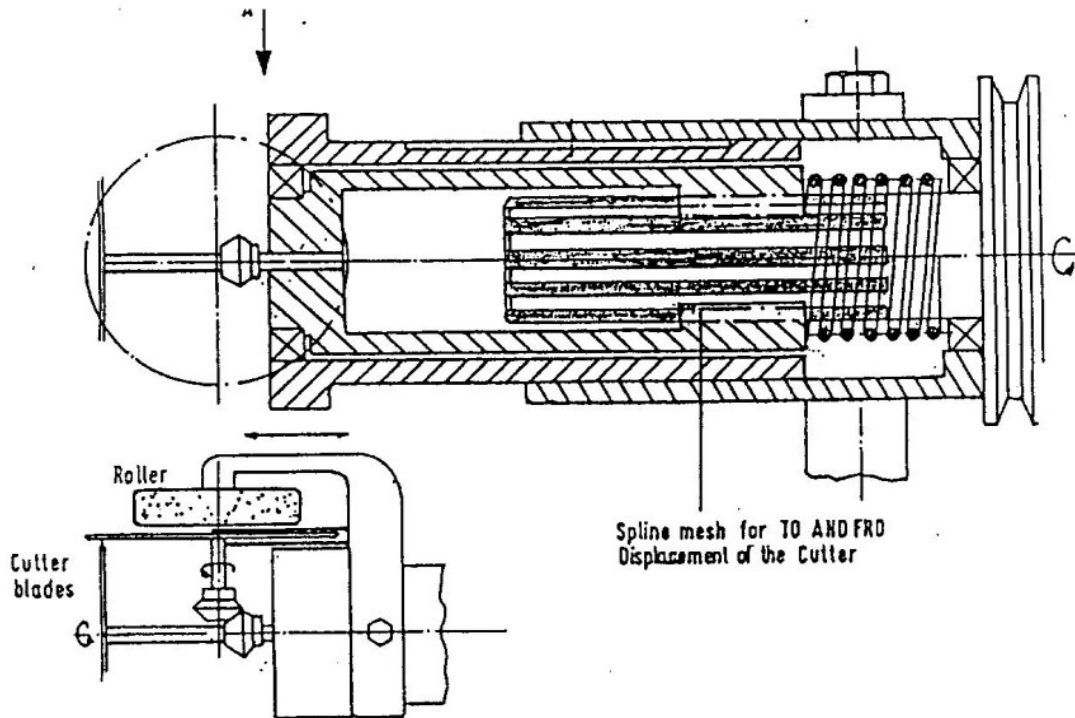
An assembly drawing for the cutter unit, showing the spline mesh for to and fro displacement of the cutter.
